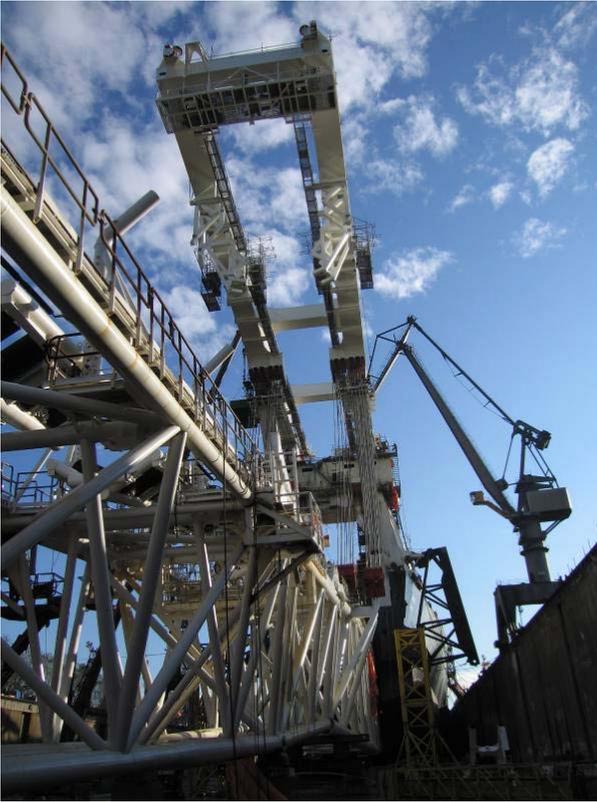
Solitaire in dry dock with the new stinger and hang-off frame
